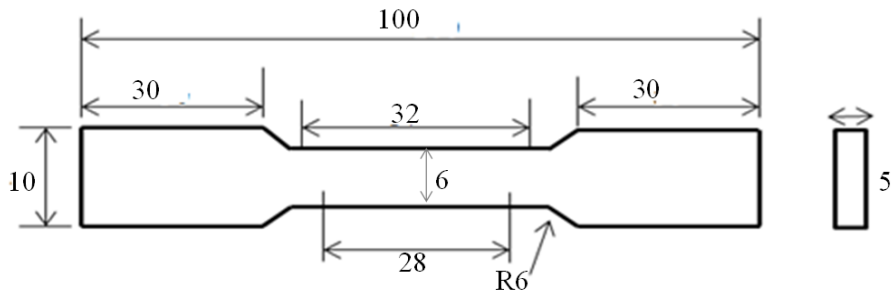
Schematic of a typical tensile test specimen (dimensions are in mm)
